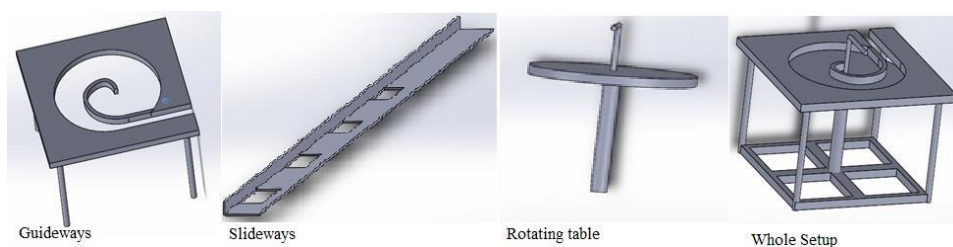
Design of Coin Sorting Machine Components Using Solid Works
